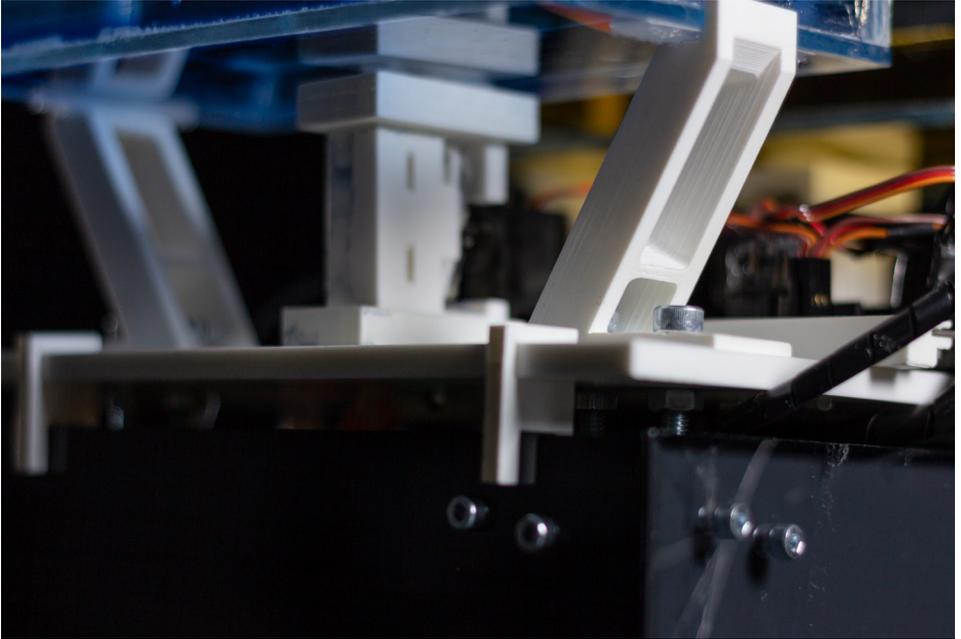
Printed parts (tank holders) holding up the pH liquid tanks
